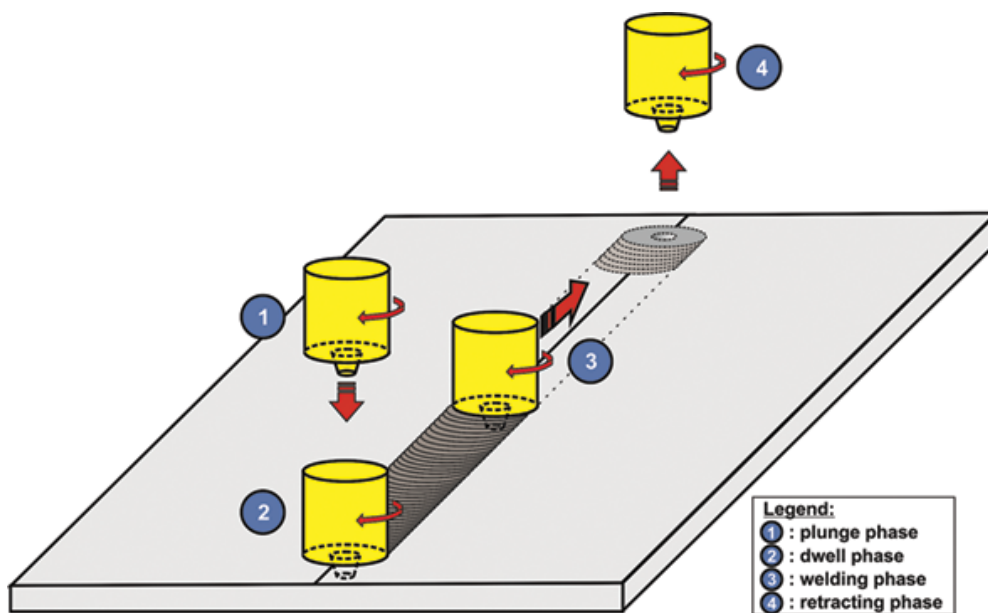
Welding sequence in FSW: (1) Immersion phase; (2) Stabilization phase; (3) Advancing phase and (4) Tool removing phase. Reproduced from [21].
